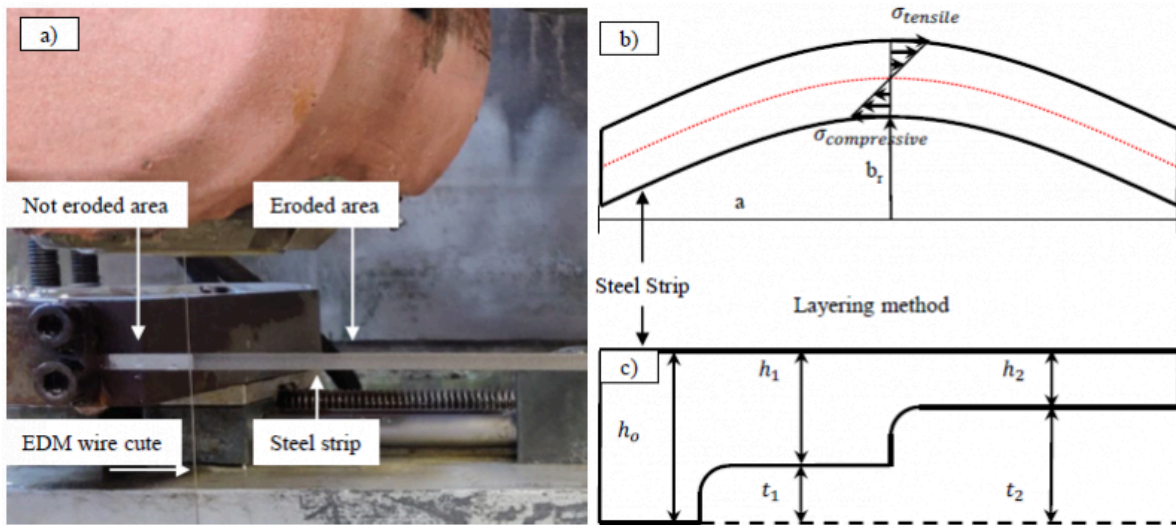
a) EDM wire cut process b) Geometrical values c) layering method using the EDM wire cut process
